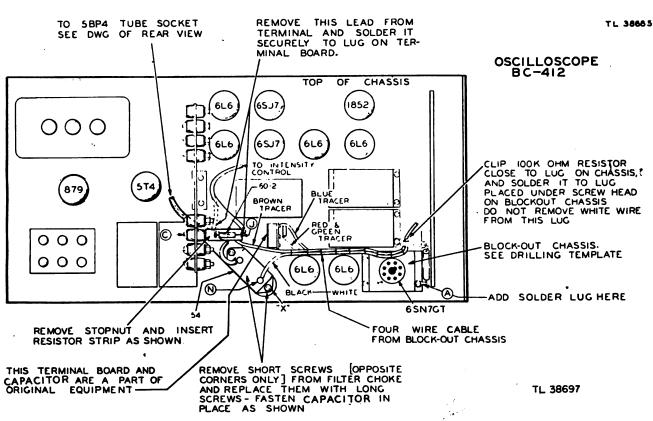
Wiring of blockout chassis on Oscilloscope BC-412.
